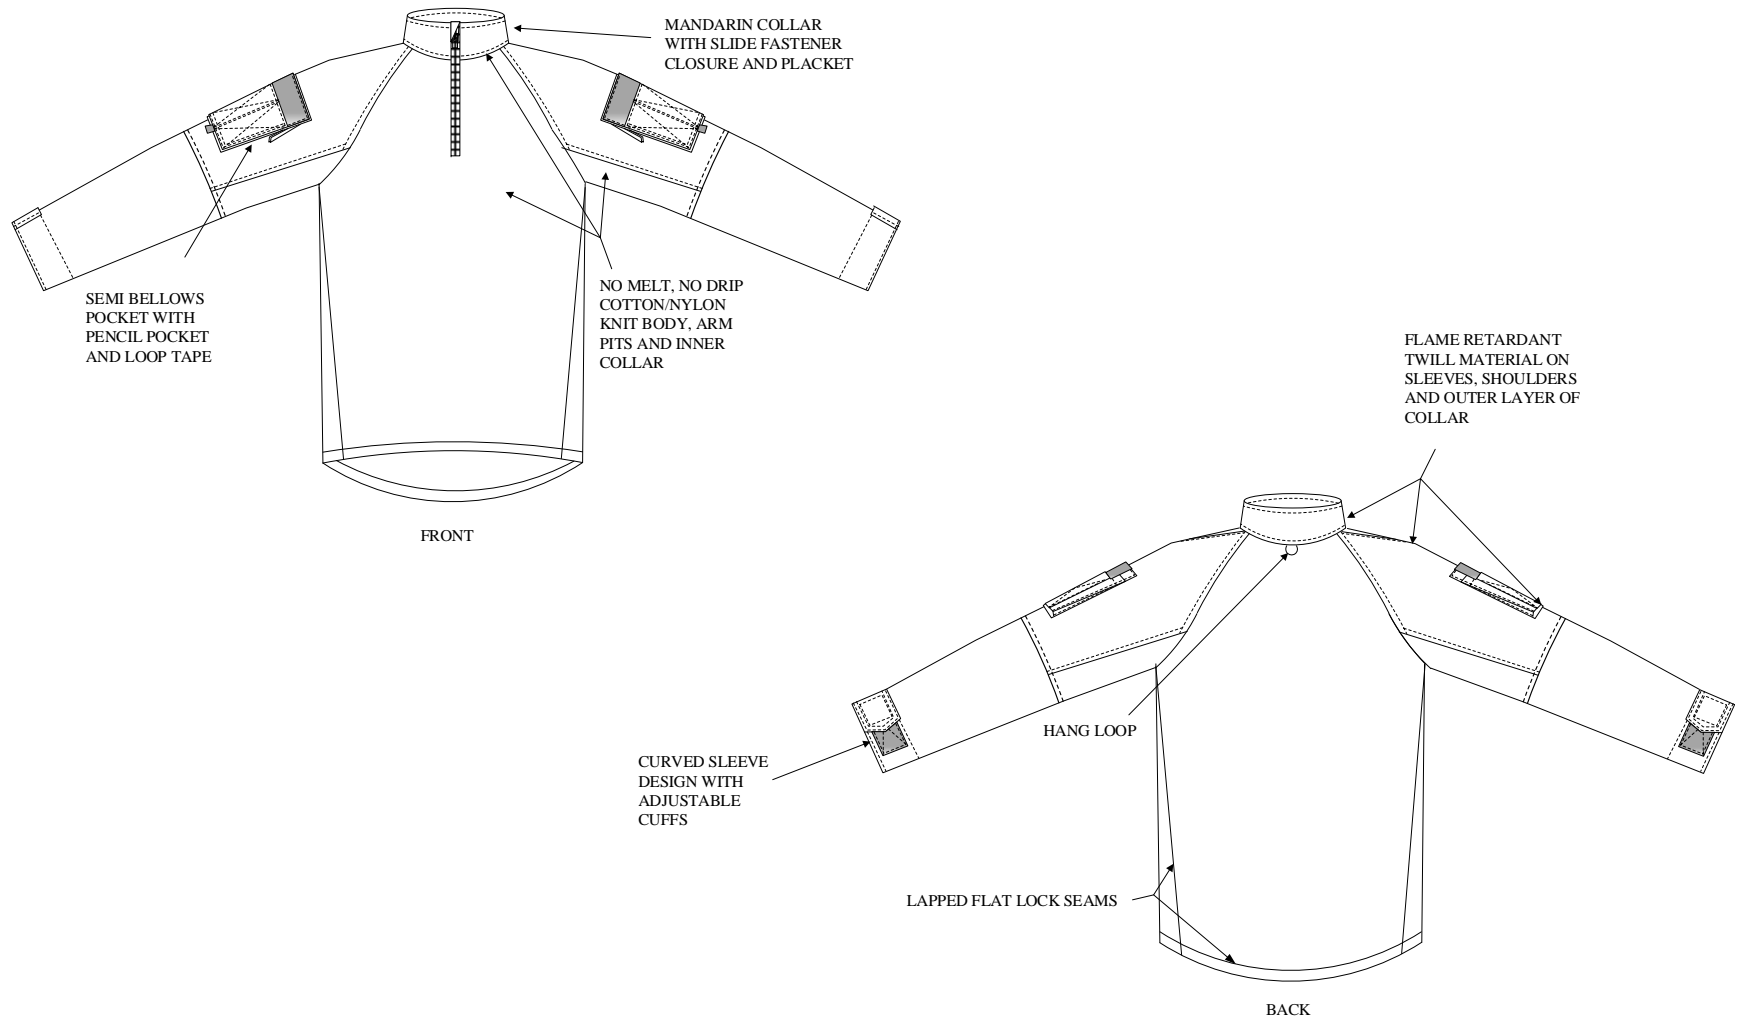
Construction Details - Sleeve Pockets and Cuffs
